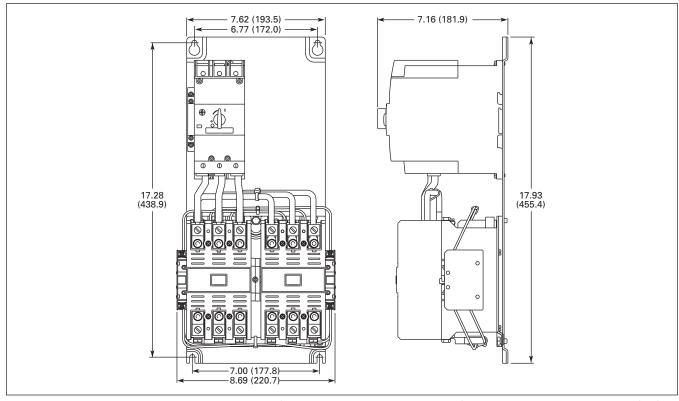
Reversing Combination Motor Controller AE359 (LSA, A309 MMP + CE55 90 mm Contactor) — Approximate Dimensions in Inches (mm)
